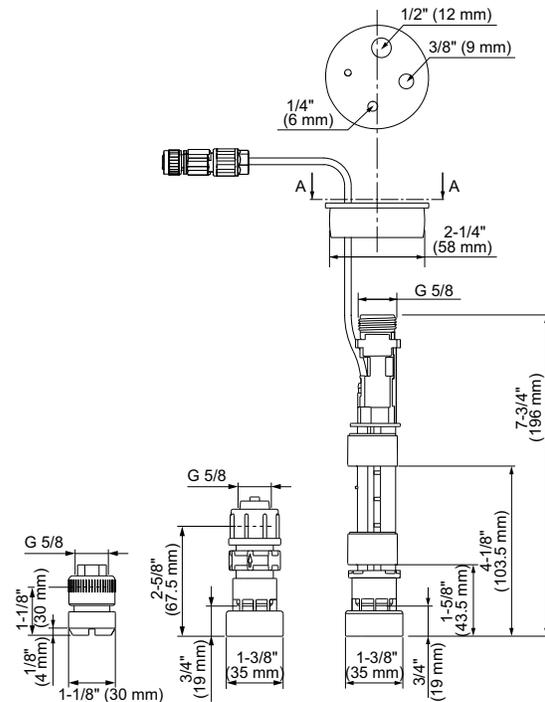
Left: stainless-steel foot valve; center and right: PE or PVDF foot valve, dimensions
